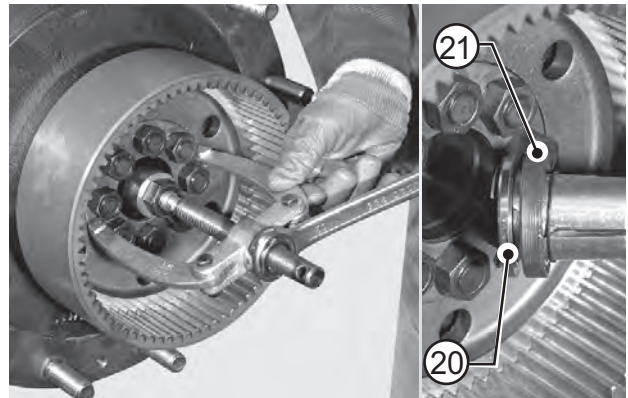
Using an extractor, remove the seal ring (21) and guide ring (20).
